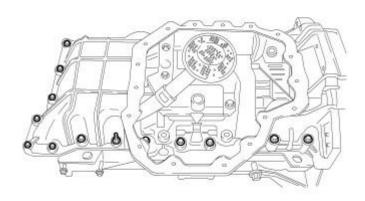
LOWER OIL PAN Courtesy of CHRYSLER LLC
